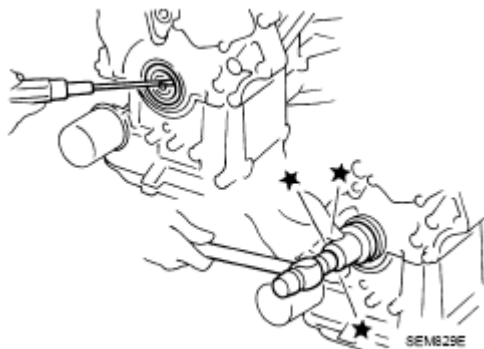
Removal/Installation Of Front Oil Seal Using Suitable Tool
